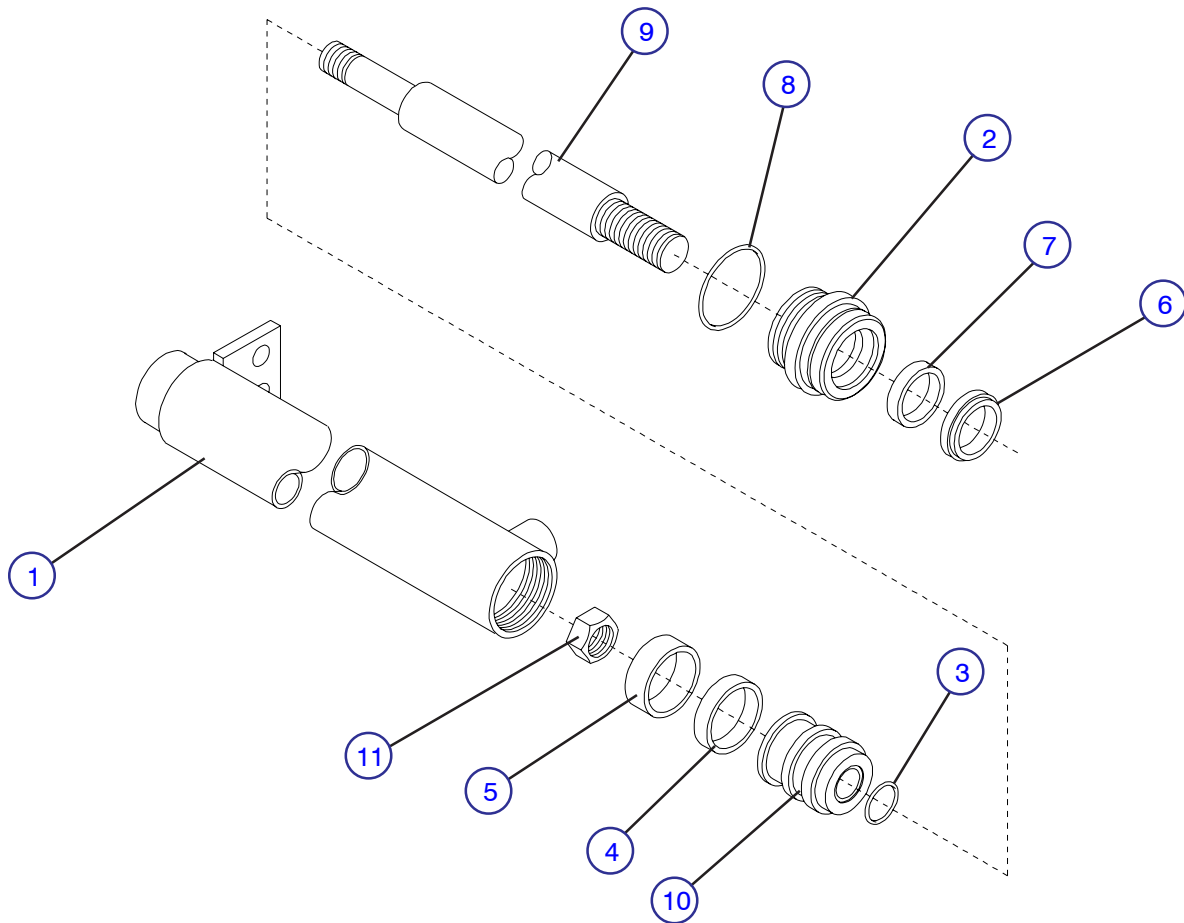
A. POWERED EXTENSION PLATFORM CYLINDER ASSEMBLY
